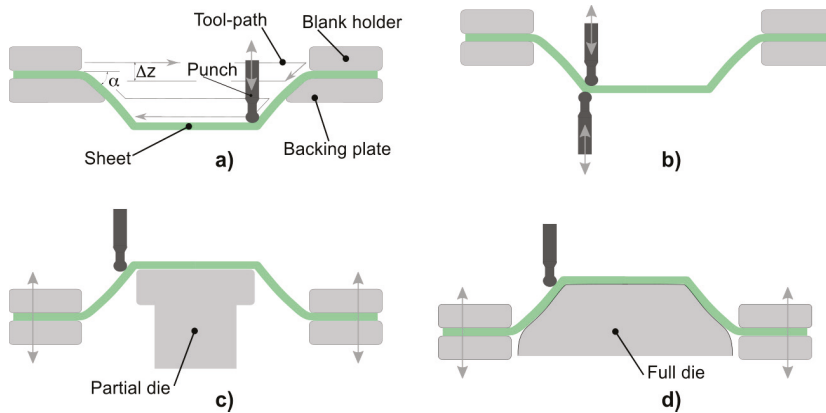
Main incremental sheet forming (ISF) techniques. (a) Single point incremental forming; (b) Two point incremental forming; (c) Double-sided incremental forming with partial die; (d) Double-sided incremental forming with full die.
